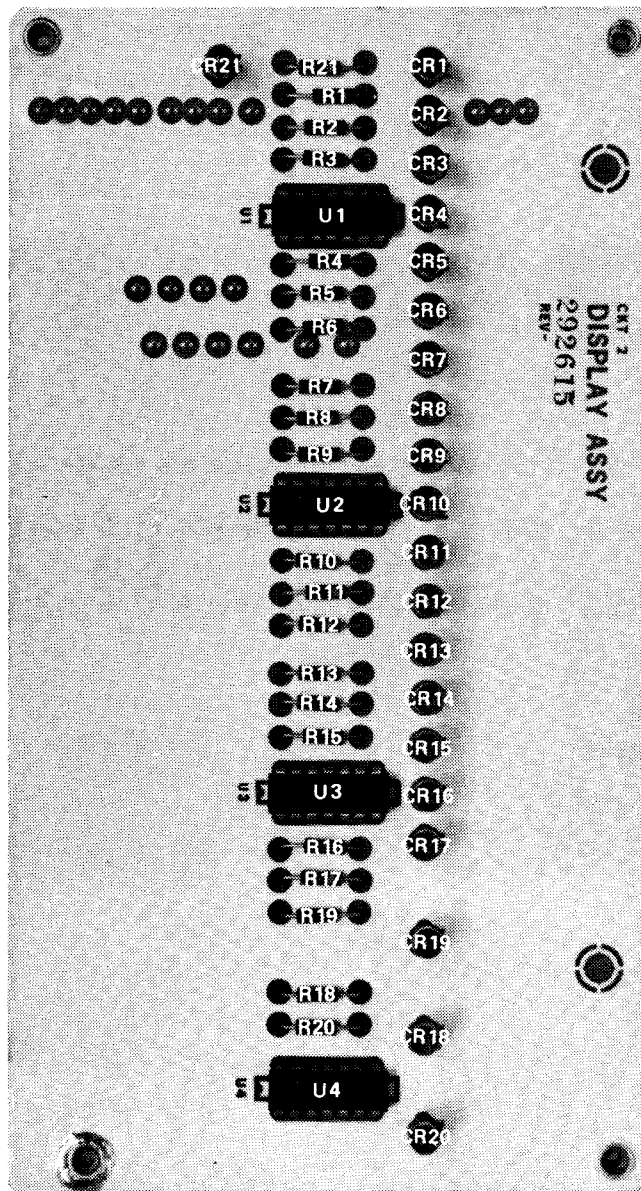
BCD DISPLAY PCB ASSEMBLY (-02 FRONT PANEL DISPLAY OPTION)
